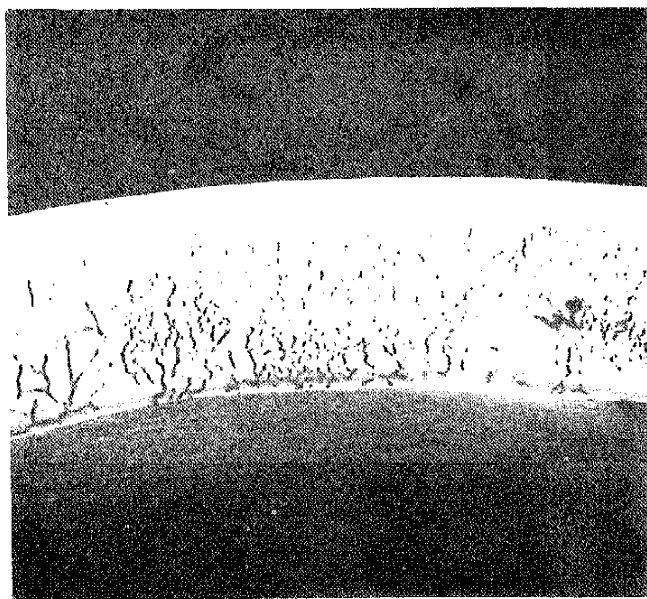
Photograph of 15 in. OD HK-30 stainless steel elbow (half-section) with severe hot fissuring apparent after penetrant
